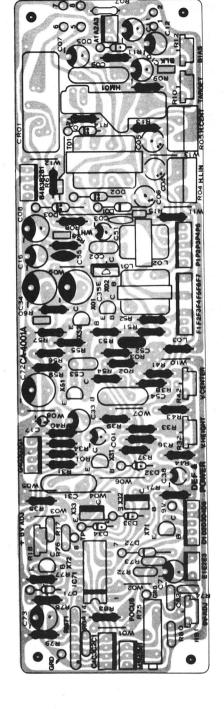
SSG and Encoder PCB (CA 3501A) Components Layout
